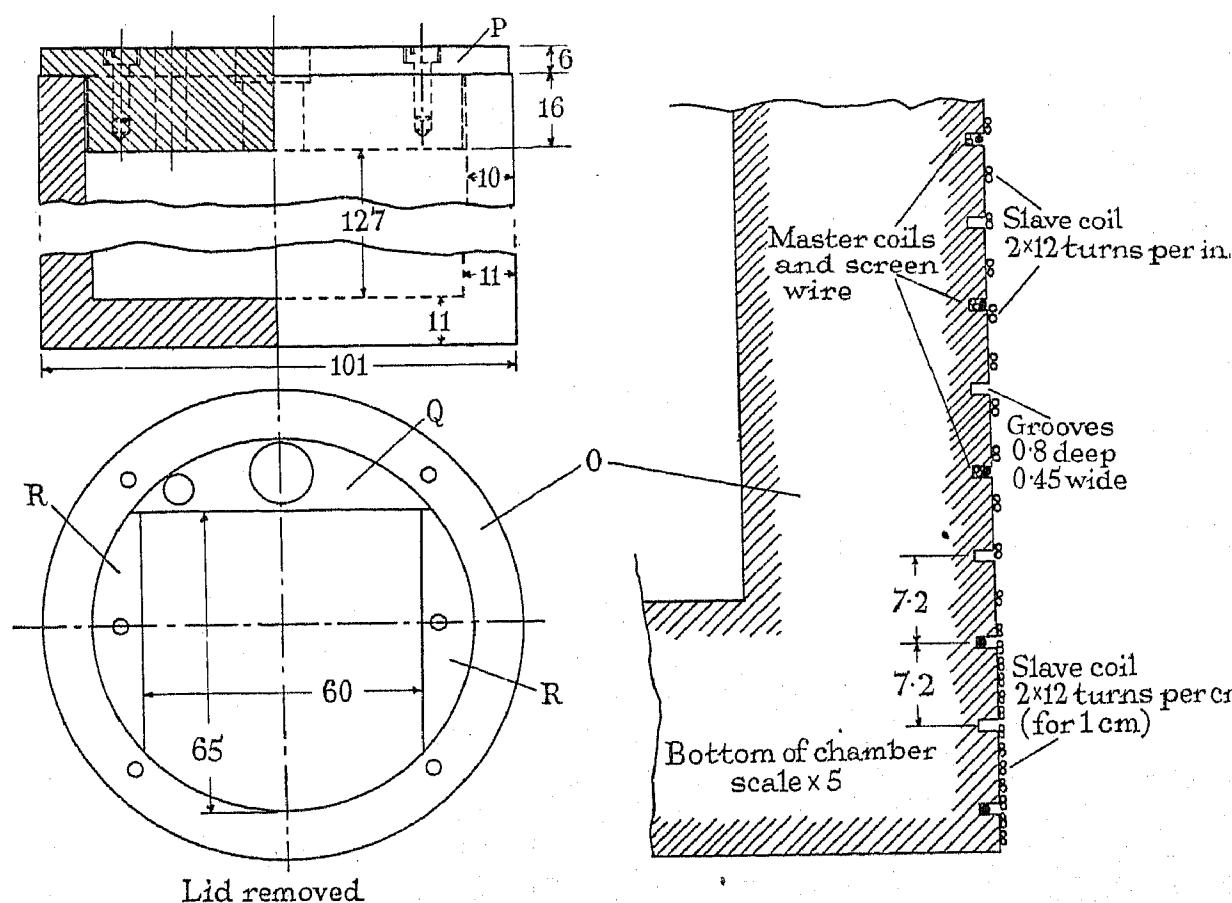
Isothermal chamber and its windings. (Dimensions given in millimetres.)
